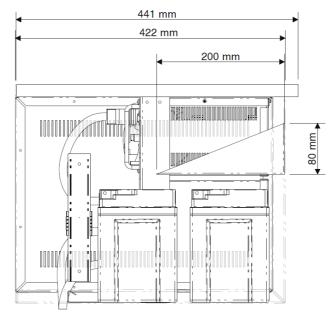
View of the indoor CM-UP Cabinet container (Side view) whit Plexiglas removable panel.
